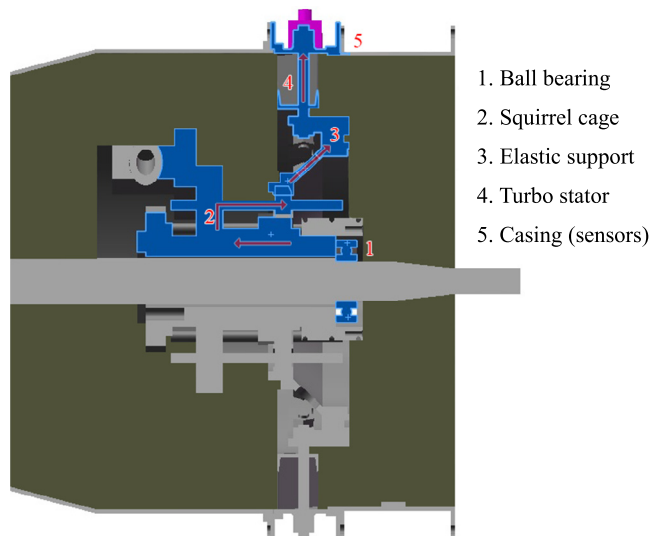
The vibration transmission path from bearing housing to casing (turbo end section).
